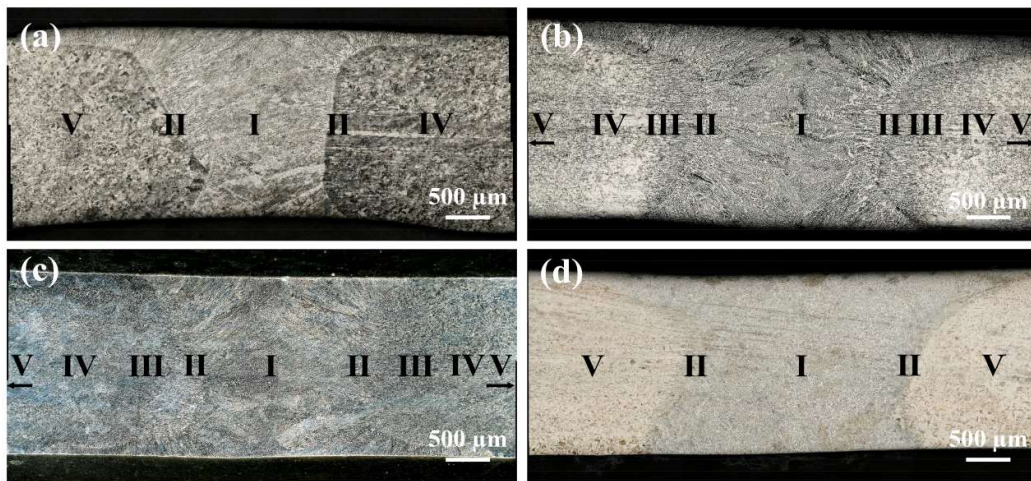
Cross-sectional macrograph of four kinds of welded joints:
